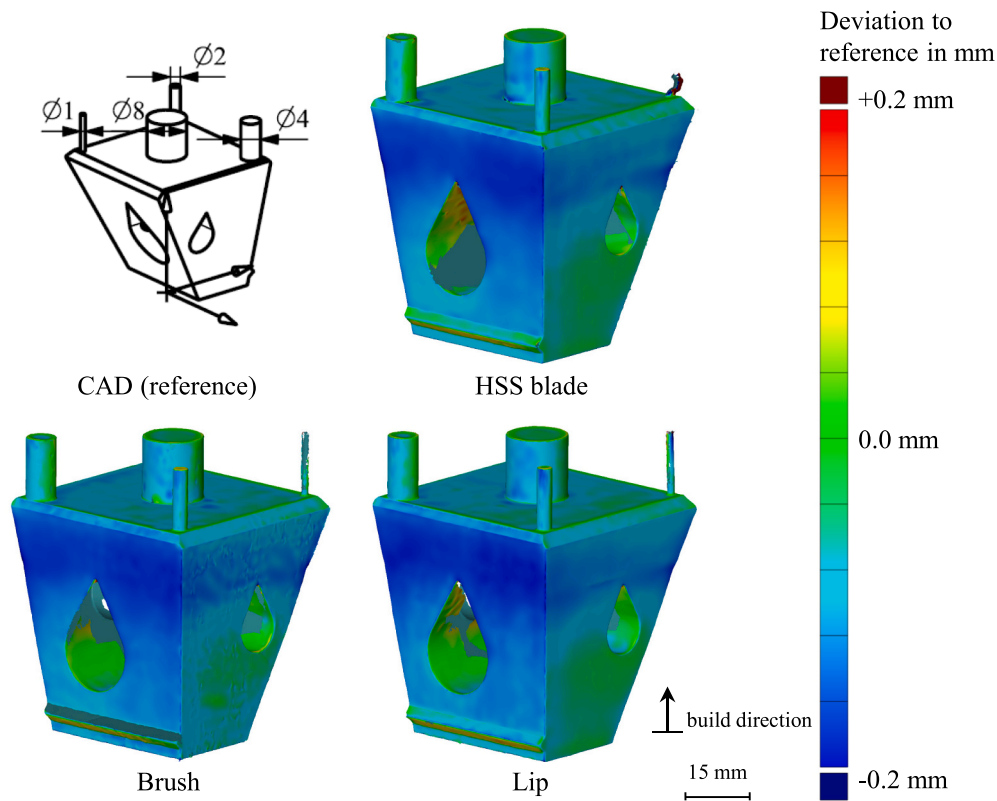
Dimensional accuracy in 3D scans with pseudo color image. CAD data aligned to scanned parts manufactured using the different spreading devices.
